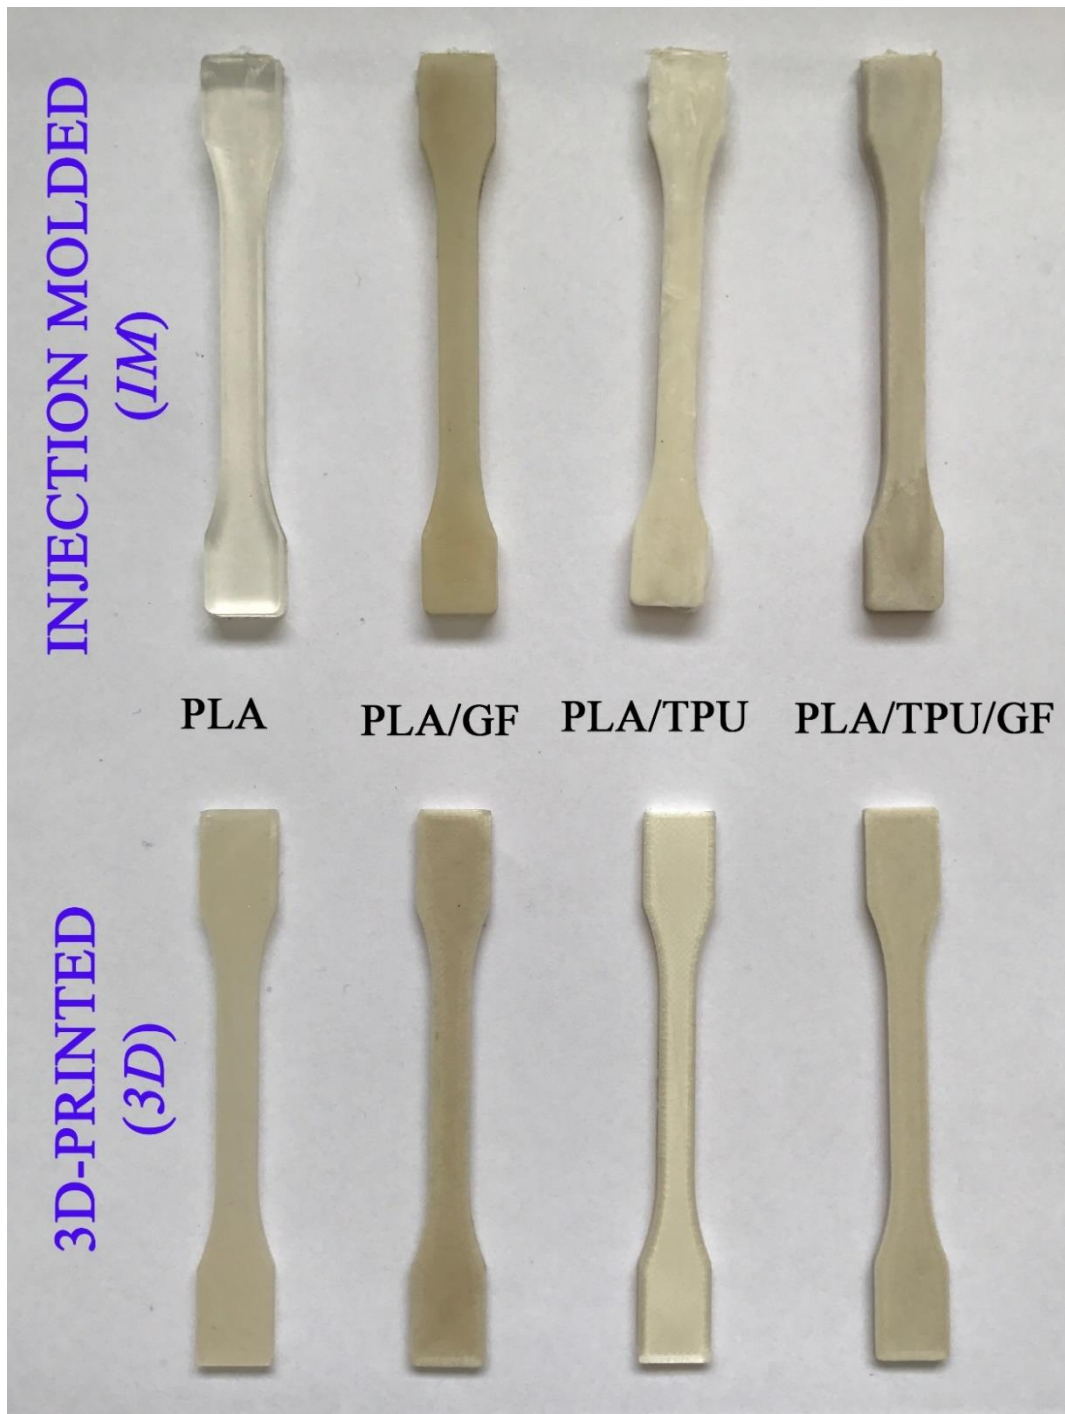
Photographic images comparing the macro level appearances of the specimens shaped by injection molding and 3D-printing
